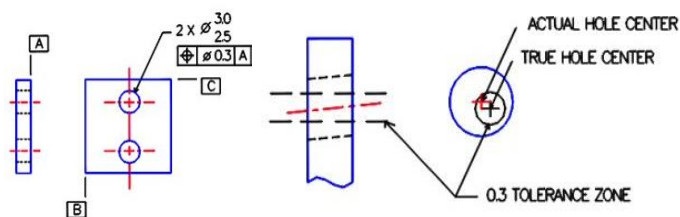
Location tolerance (eMachineShop n.d.).
